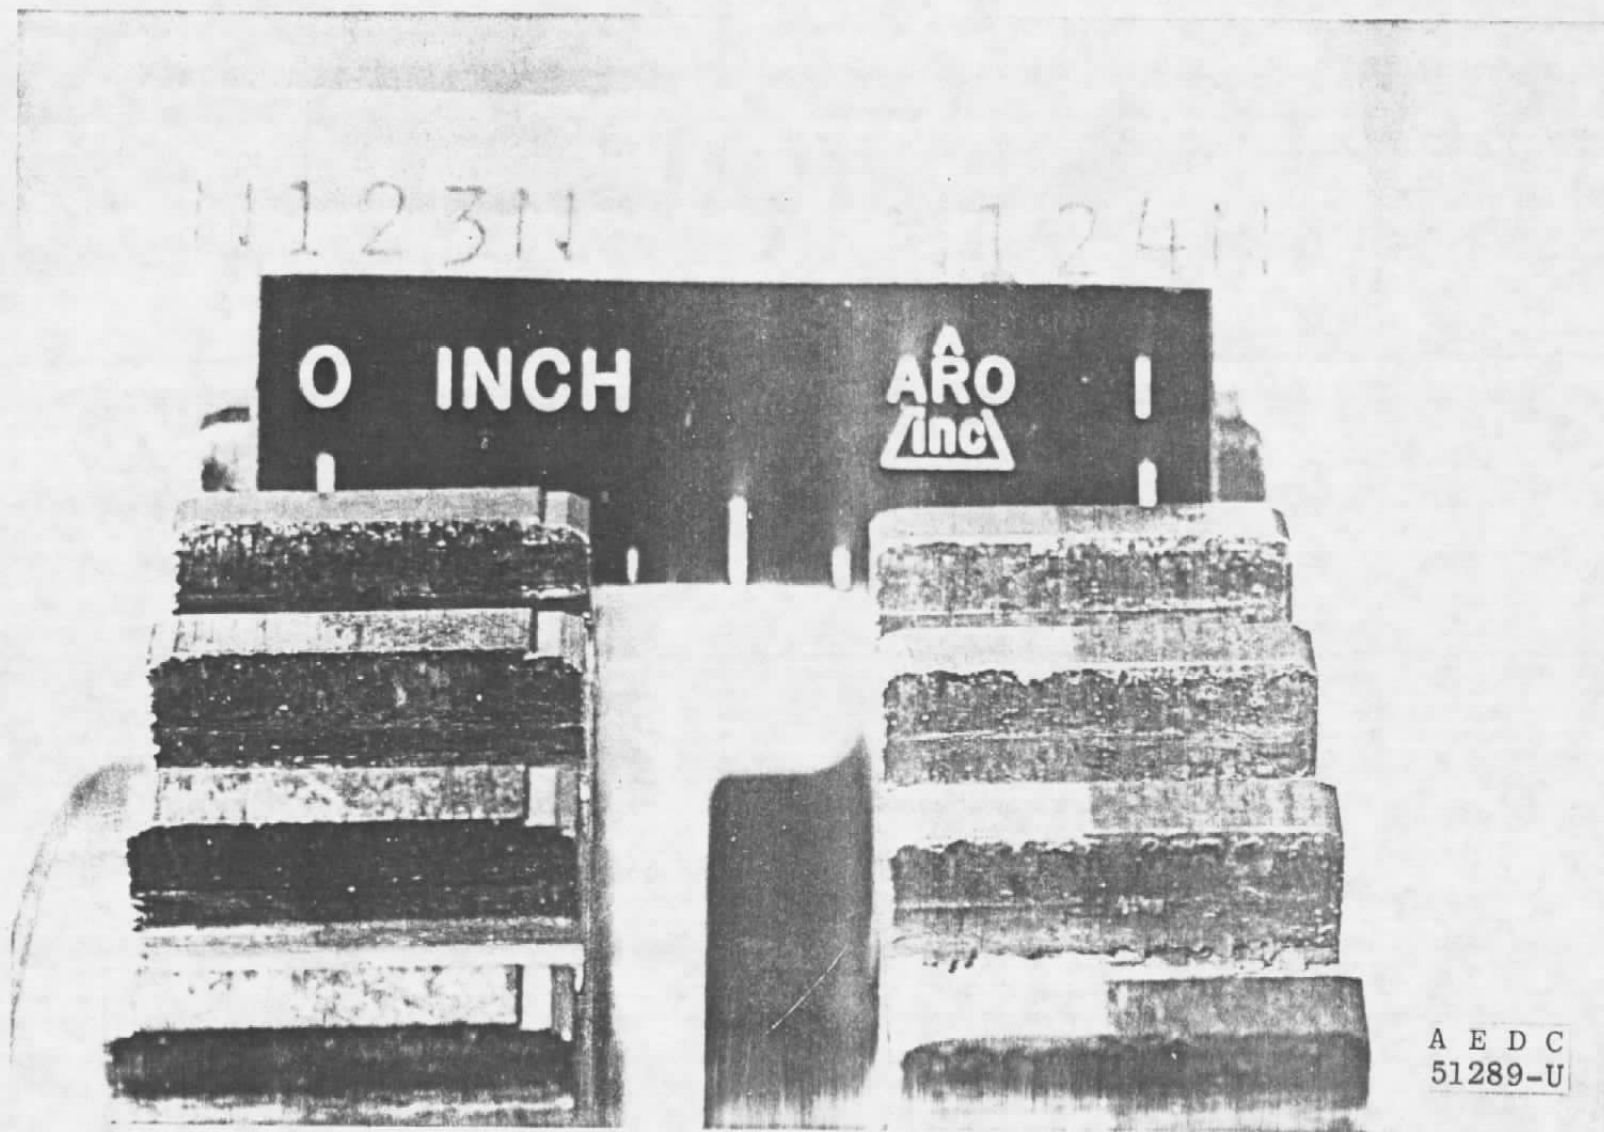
12-D.P. Steel Gears after 100 hr in Test 3
